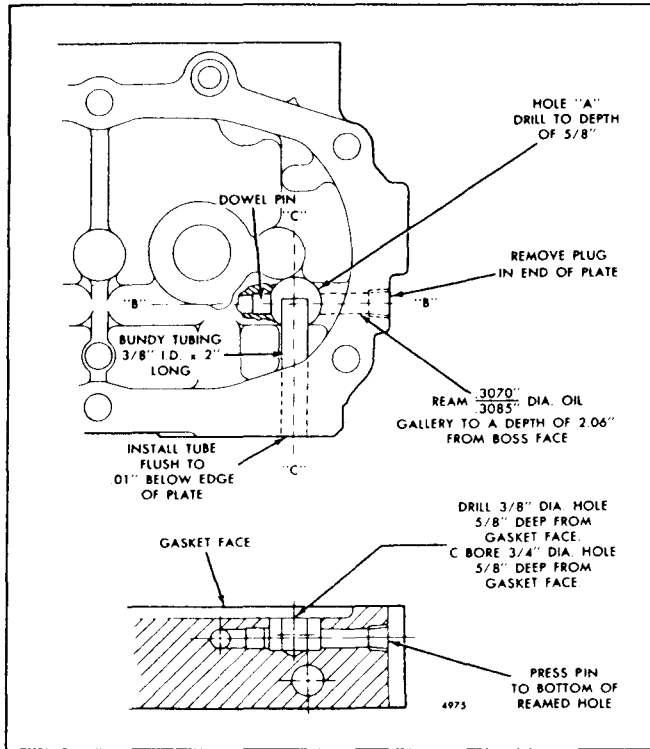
Dimensions for Reworking Front End Plate (6V Engine)
